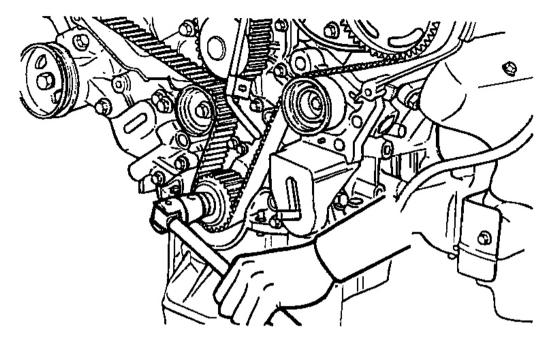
Removing The Timing Belt Courtesy of KIA MOTORS AMERICA, INC.
